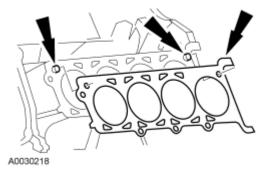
Head Gasket & Dowel Pins Courtesy of FORD MOTOR CO.
